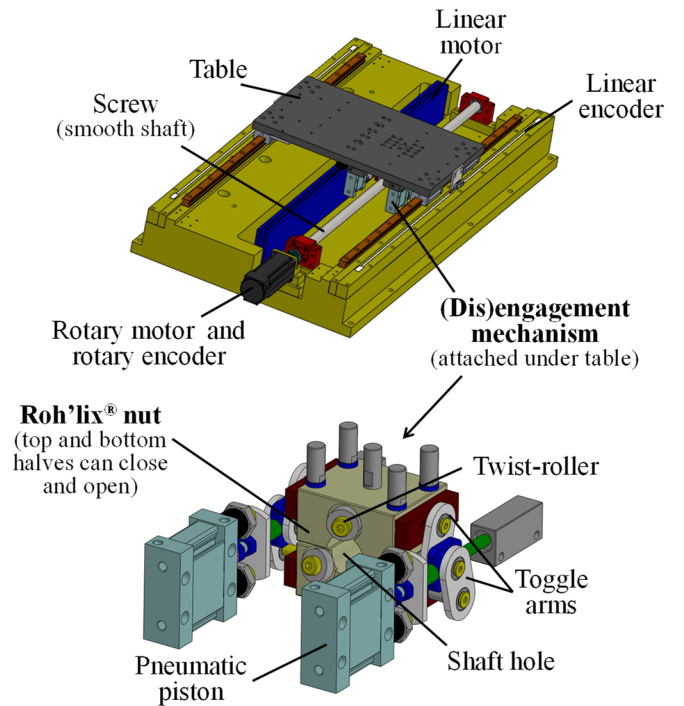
HYBRID FEED DRIVE WITH (DIS)ENGAGEMENT MECHANISM
